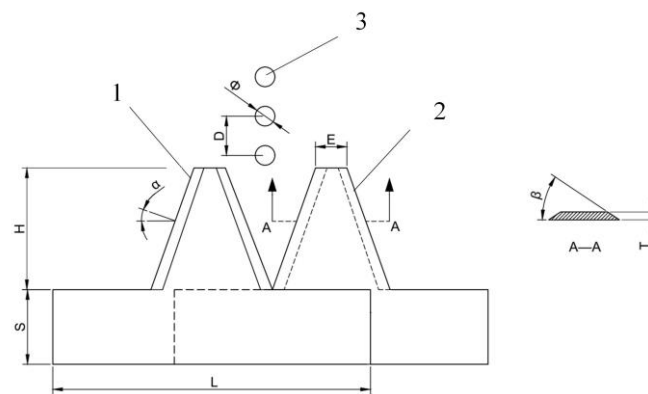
The structural diagram of the geometric model: 1—upper cutting blade; 2—bottom cutting blade; 3—stalk.
